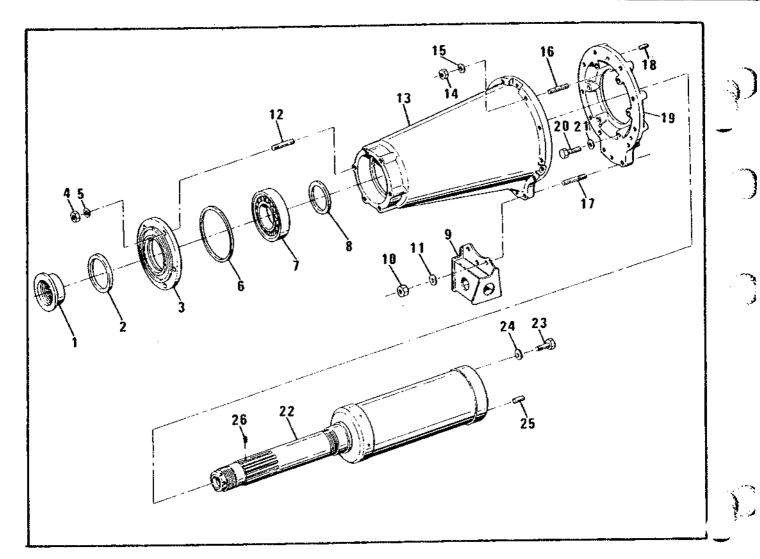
CRANKCASE AND CRANKSHAFT EXTENSION ASSEMBLIES MODEL 10-470-P
